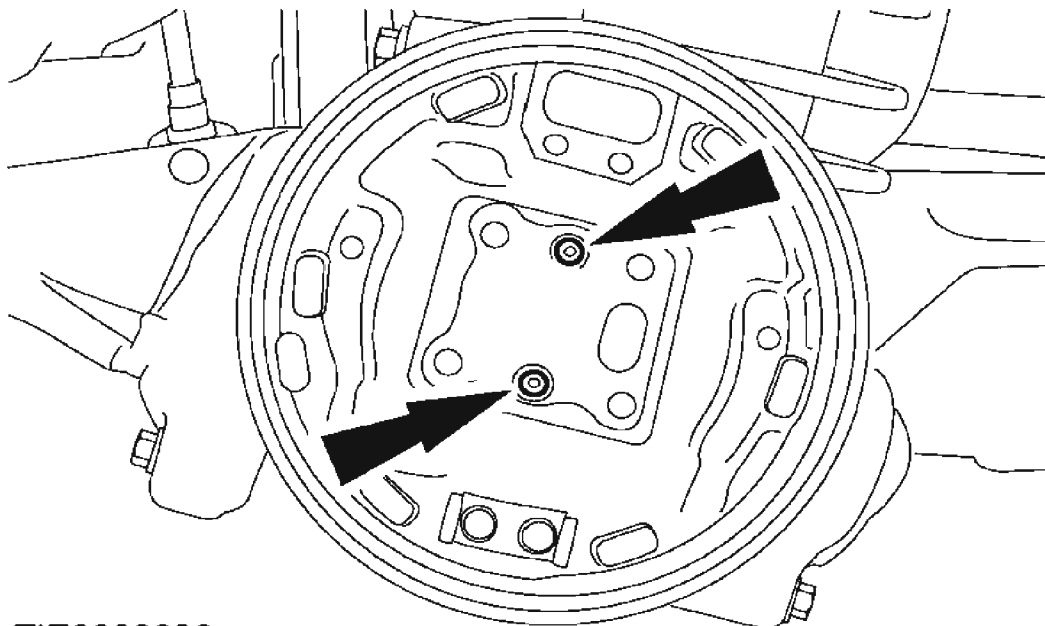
Removing Backing Plate Rivets And Remove Backing Plate
